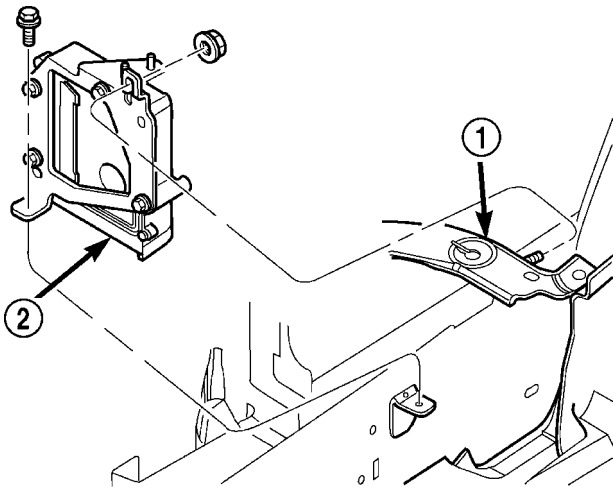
Transmission Control Module (TCM)—Removal/Installation
